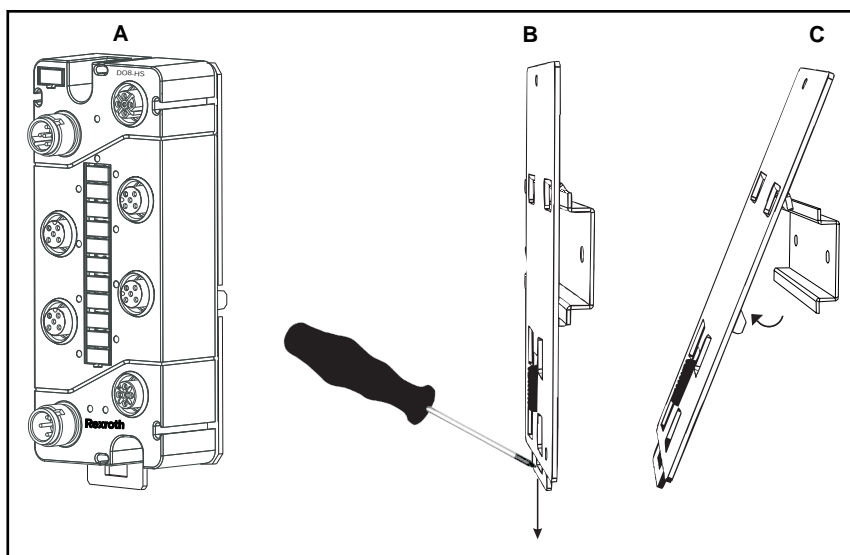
Removing the module with mounting rail adapter from the mounting rail
